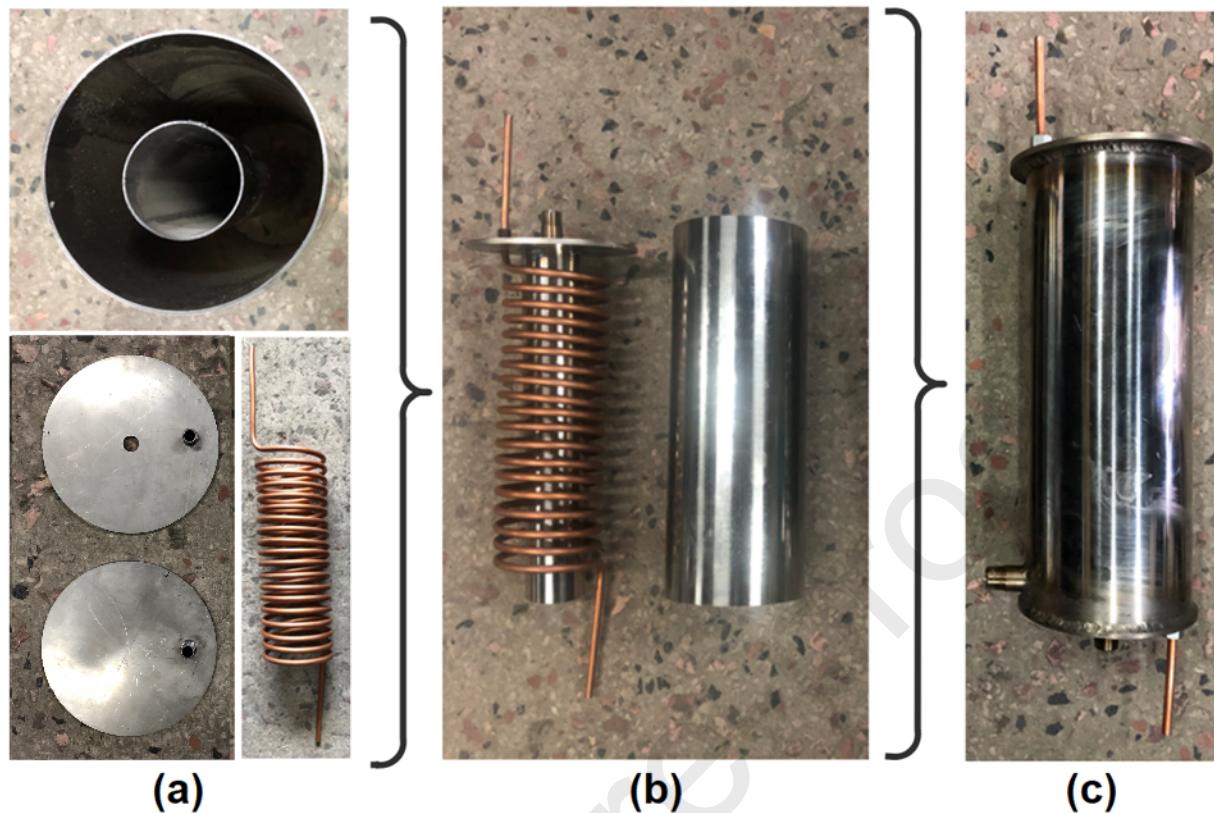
Fabrication steps of shell and helically coiled HE; (a) components, (b) placement of the helical coil, (c) final assembly
